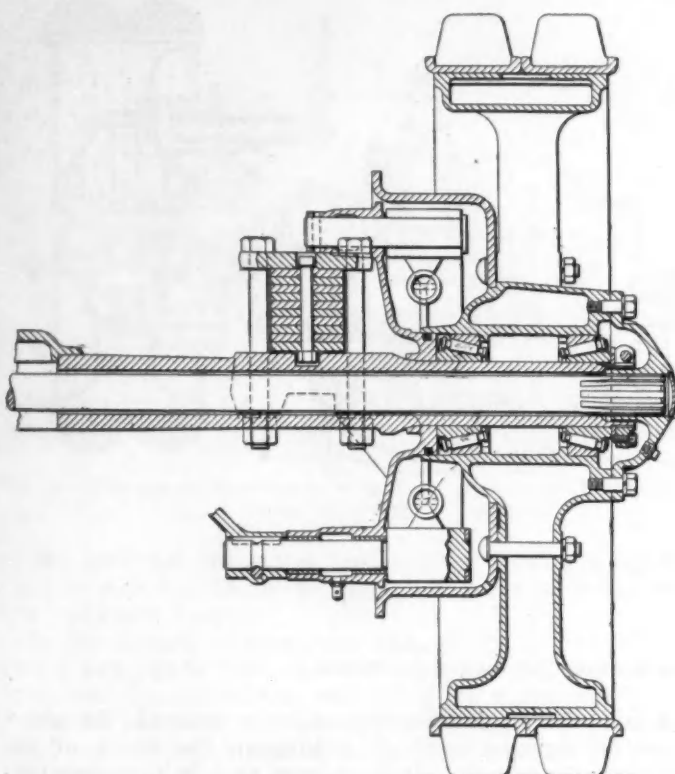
CROSS-SECTION THROUGH THE REAR WHEEL OF DOUBLE-REDUCTION AXLE
